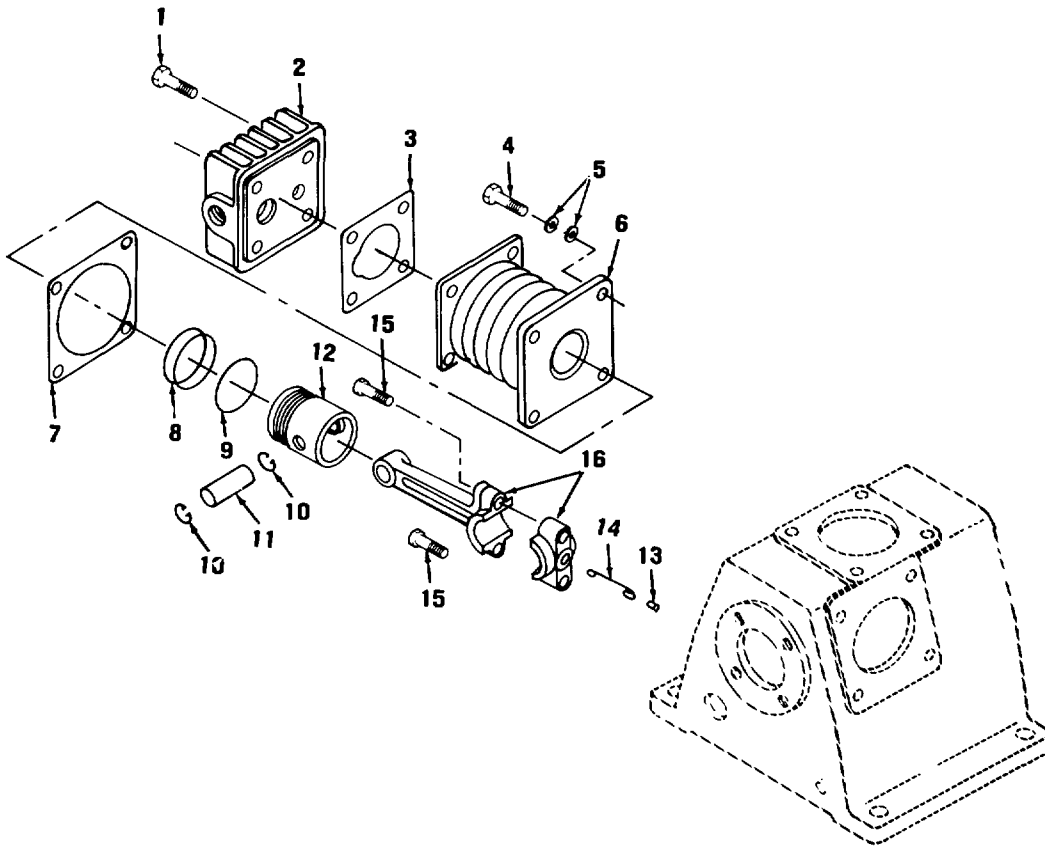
Second Stage Piston, Connecting Rod, and Cylinder Block
